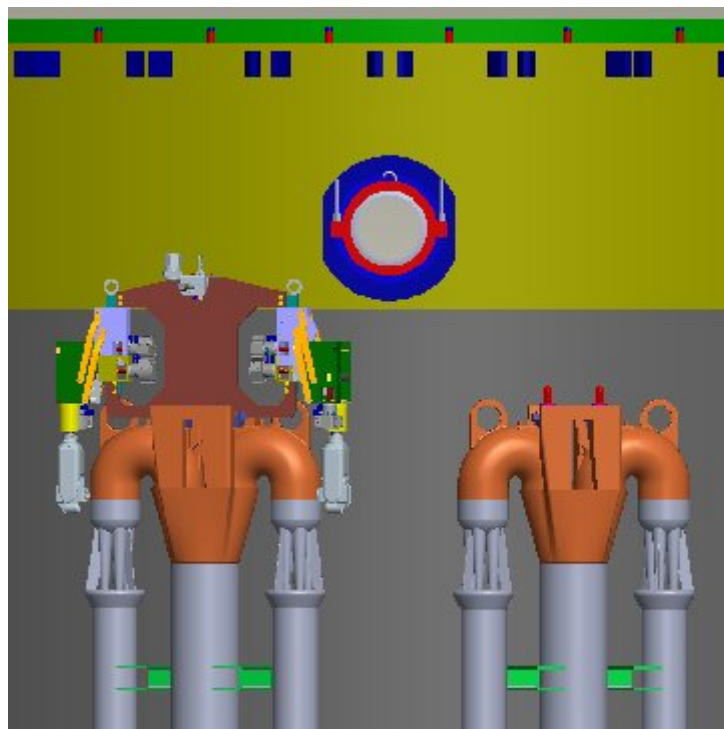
Inspection Arm Shown on Jet Pump Assembly
